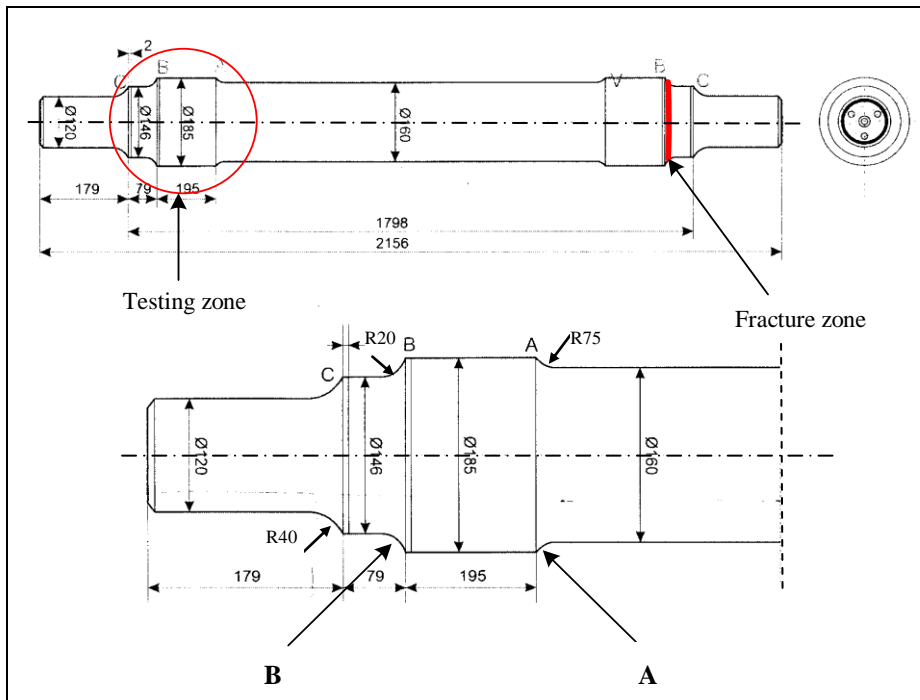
Drawing of the tested railway axle with the fracture location and zone examined by the NDT methods
